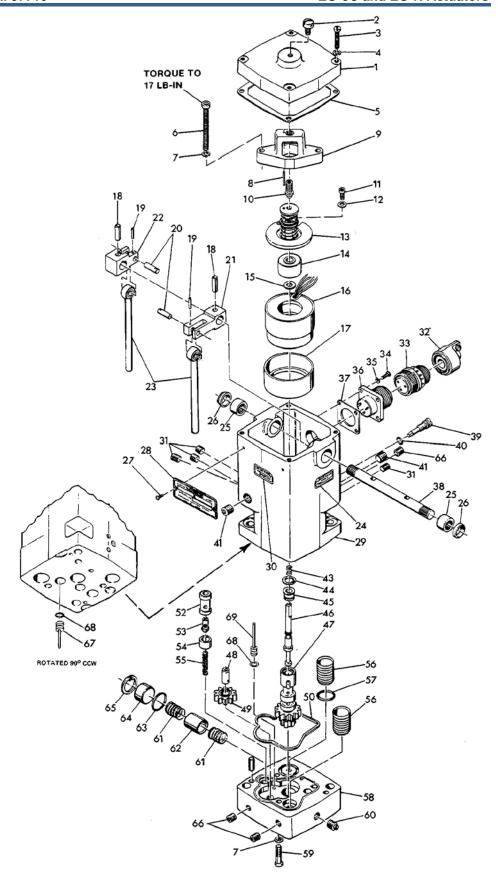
Exploded View, EG-3C Hydraulic Actuator
